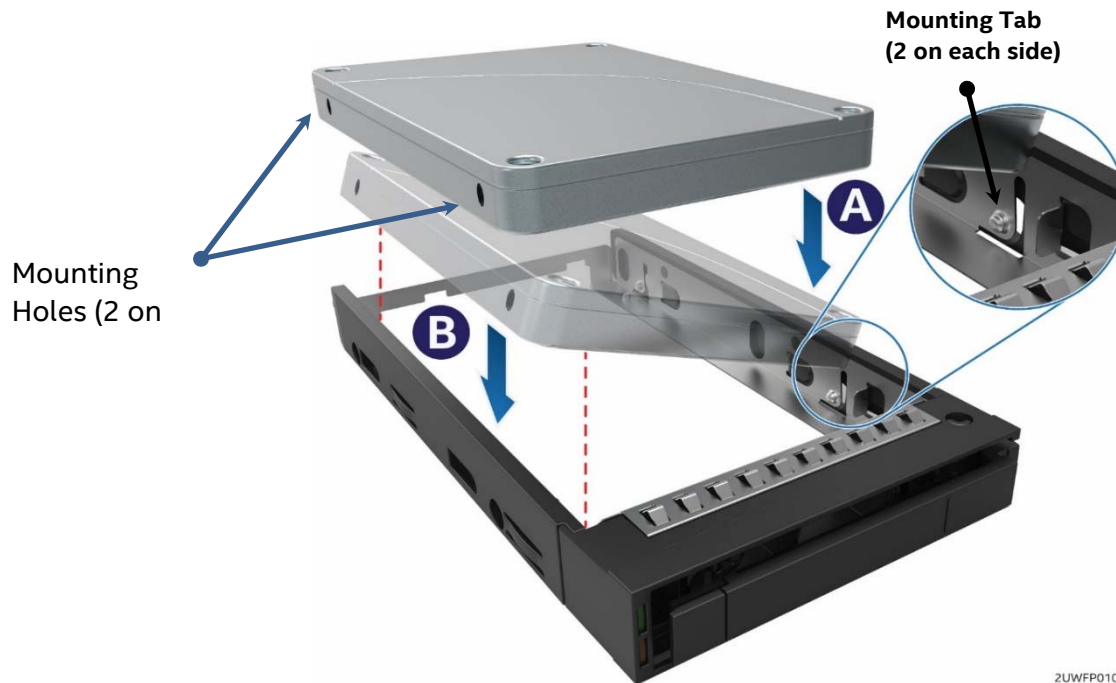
2.5" Drive Carrier Assembly – Drive / Drive Blank Removal
